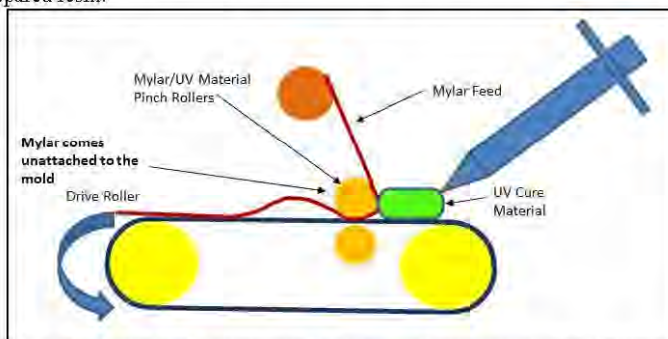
Schematic illustrating the previous configuration of the roller system. In this setup, the mylar backing material would not stay in contact with the belt mold surface after going through the pinch rollers.
